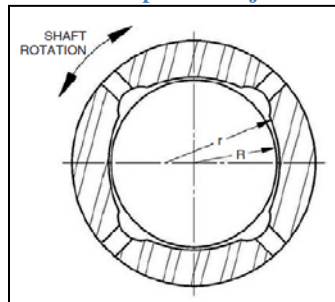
28 Four-lobe preloaded journal bearing. [18]
